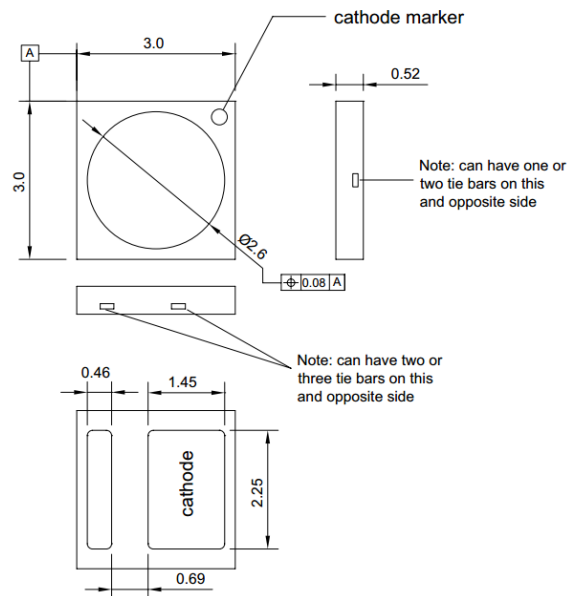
Mechanical drawings for LUXEON 3030 2D Line
